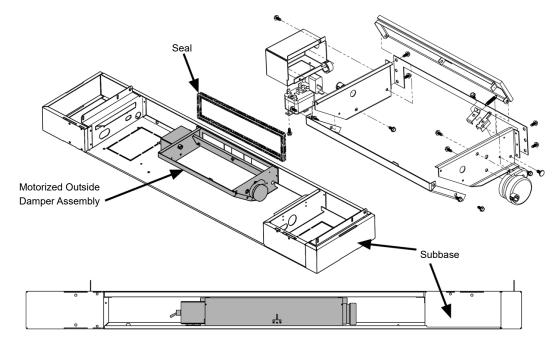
Motorized Outside Air Damper Assembly (See IM 974 for detailed installation instructions)
